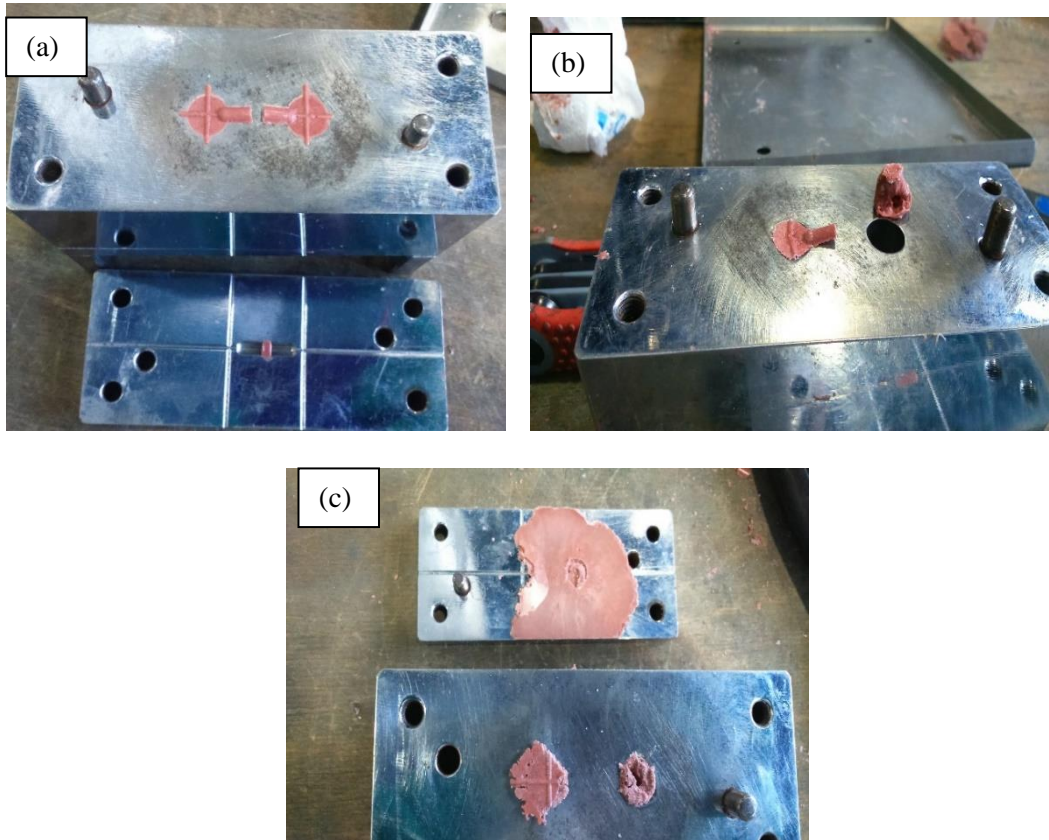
; Mould parts quality checking, a) good mould sample, b) and c) defect samples of short shot and flashing
